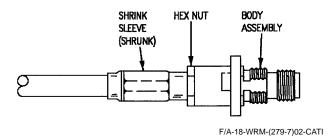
31-34181-2 Triaxial Connector Repair (Sheet 3)
